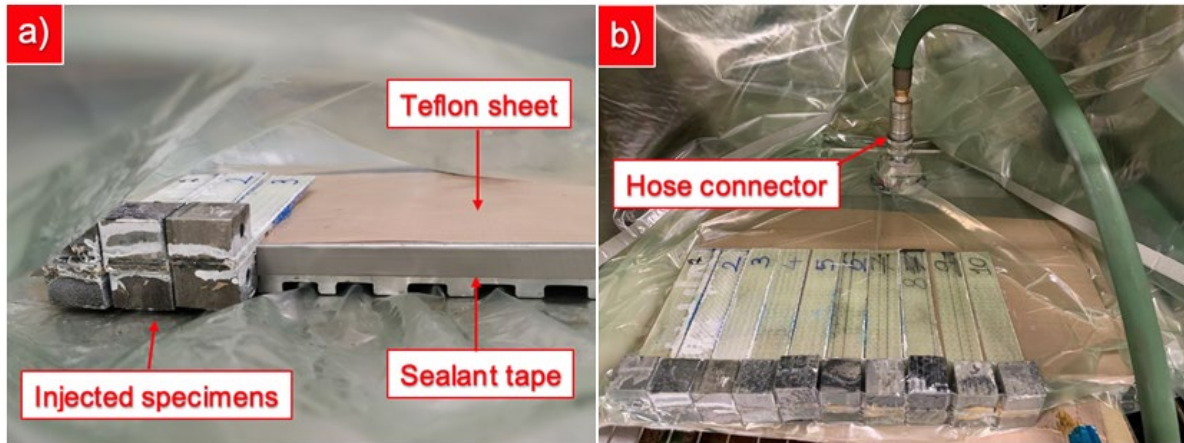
a) Lay-up of specimens on repair set-up; b) Assembly with vacuum bag and hose connection
